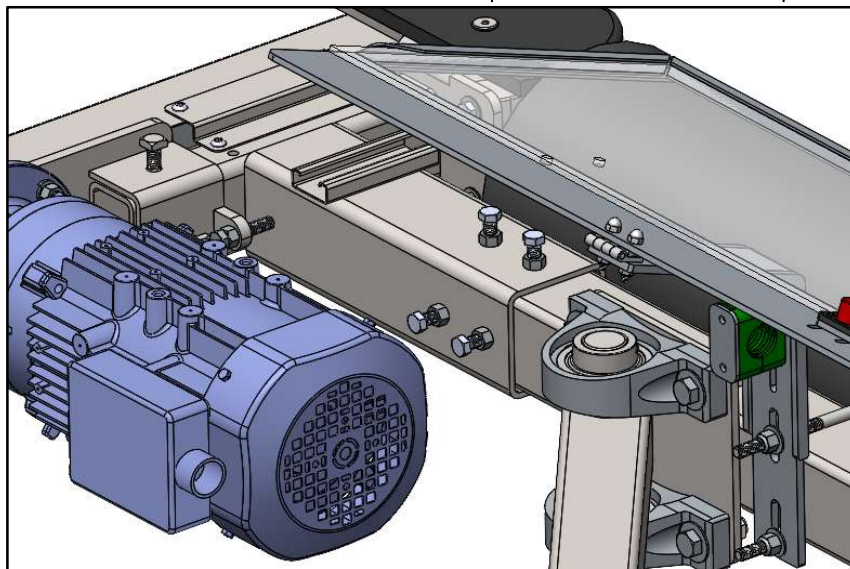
Mount method of second hinge mount. Note position of hinge mount relative to bearing mount plate.
